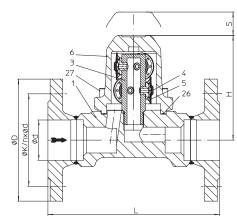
1....6K2 (DN40-50) with 6 capsules, with flanges
